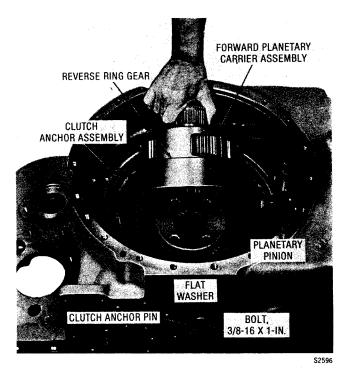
Installing forward planetary carrier assembly and reverse ring gear
